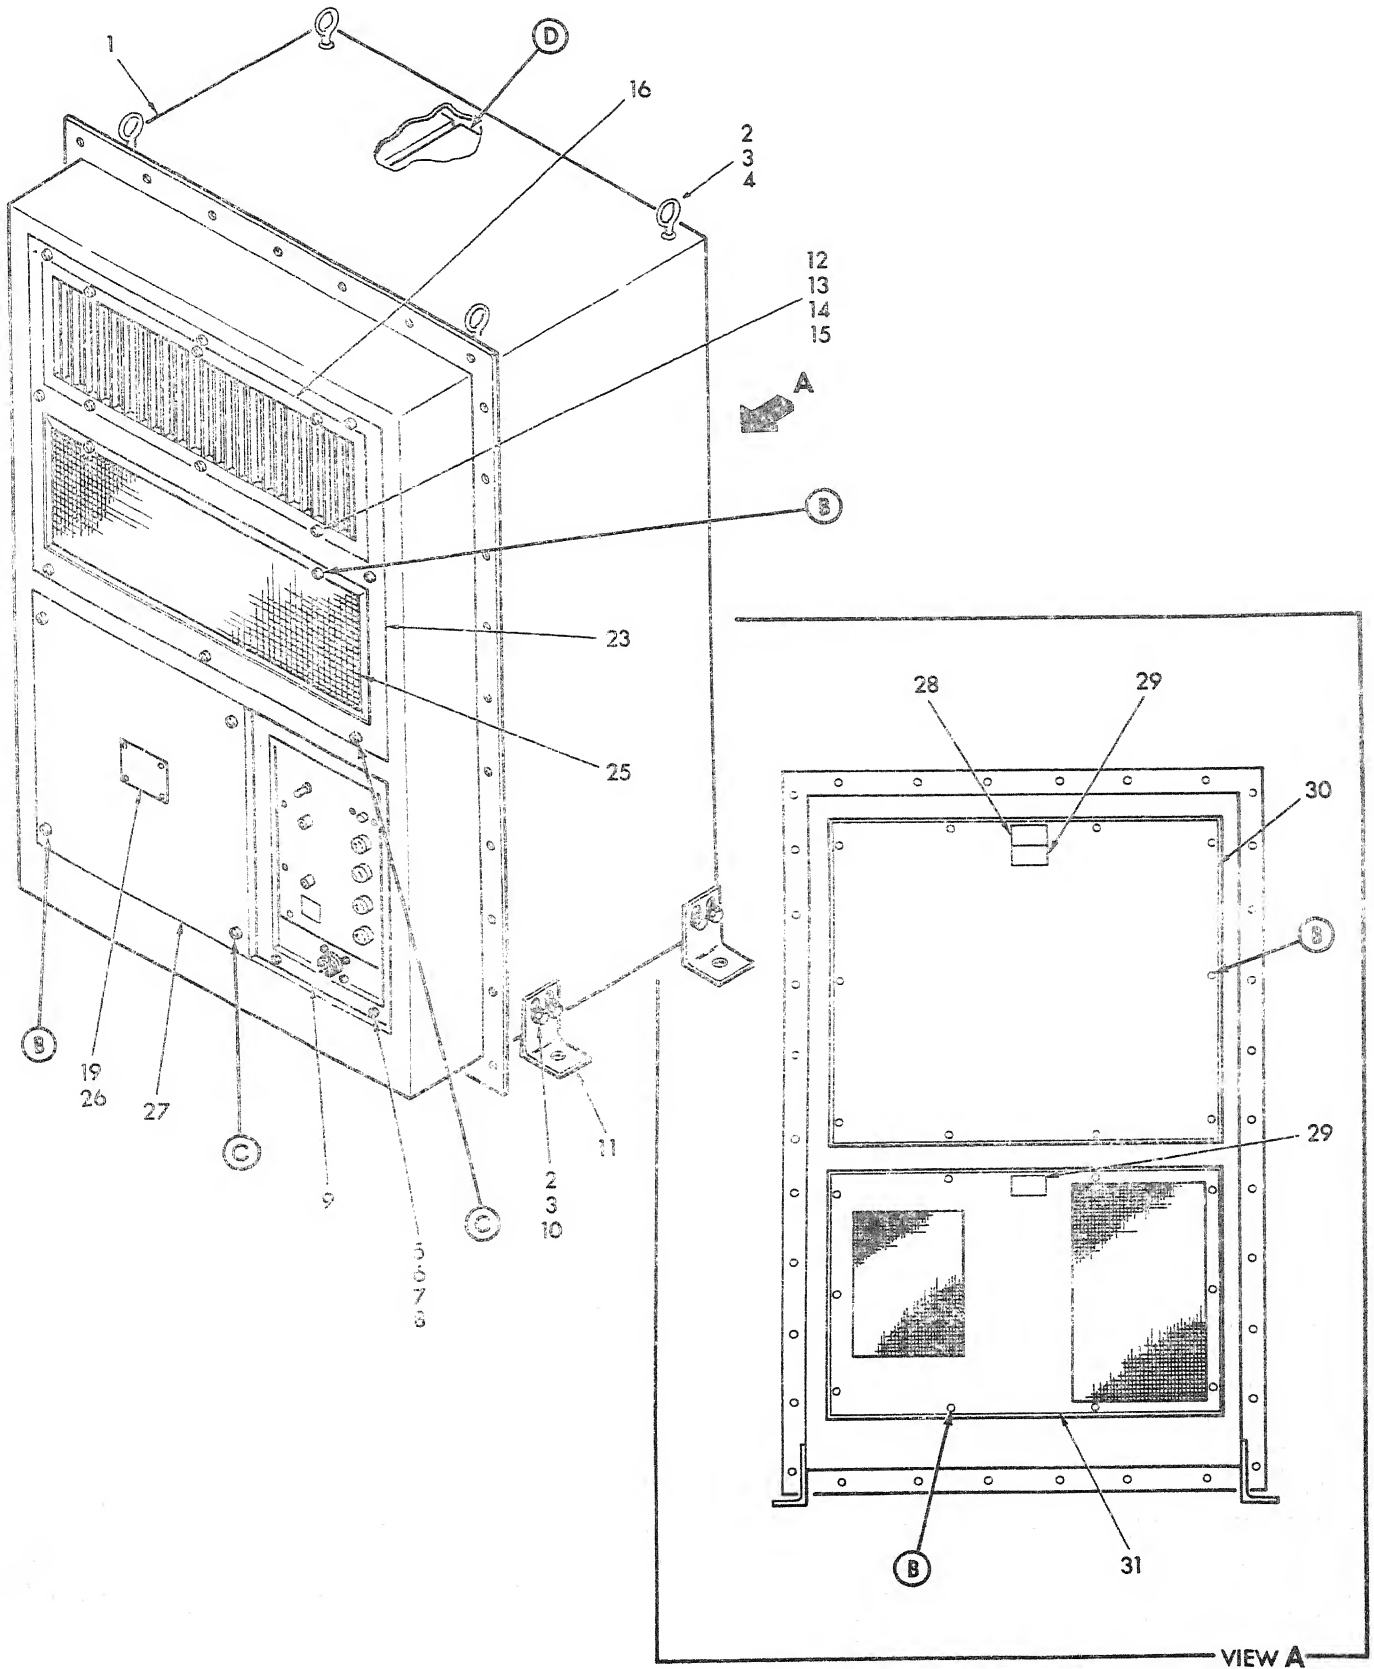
CHASSIS SECTION (SHEET 1 OF 2)
